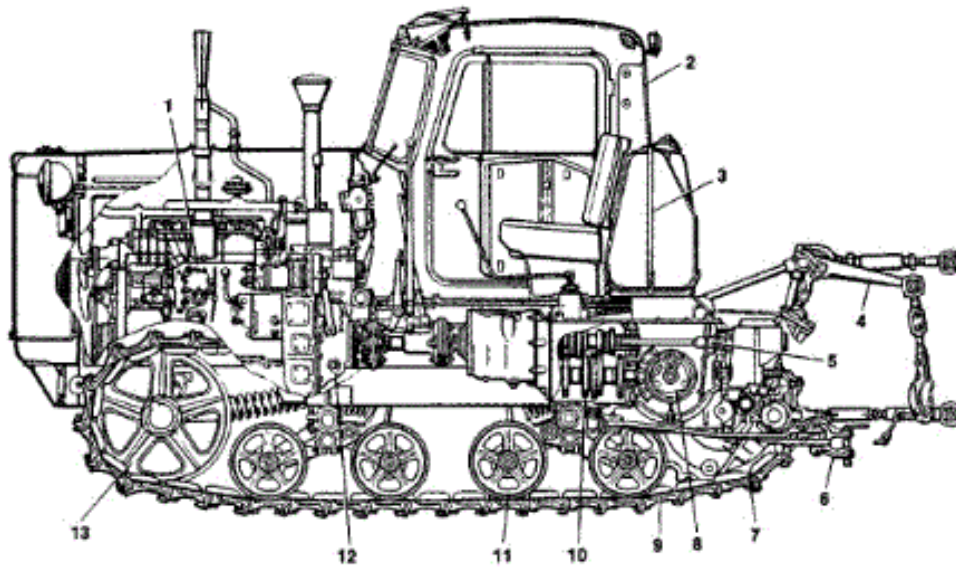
Crawler tractor: (1) engine, (2) cab, (3) fuel tank, (4) levers of tool-bar assembly, (5) power takeoff shaft, (6) hitch, (7) driving sprocket, (8) main drive, (9) crawler track, (10) gear box, (11) bogie wheel, (12) clutch, (13) Idler wheel
